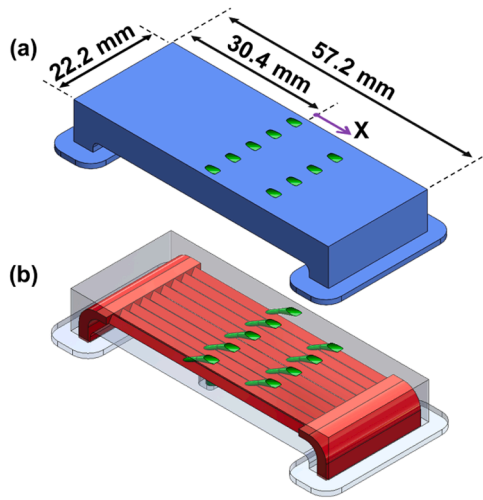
Test coupon (a) external dimensions and (b) internal geometry.
